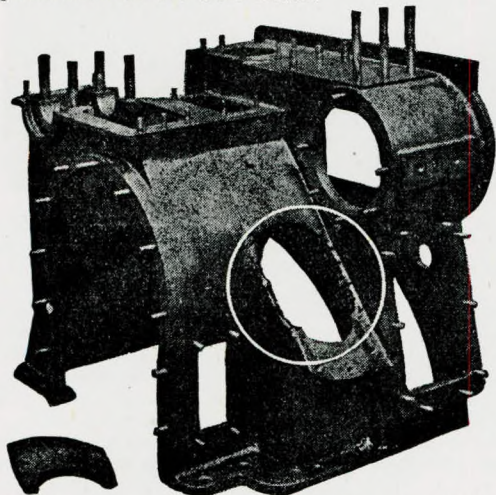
The rear-end top casing of a high-speed marine engine from which an air pump seating was broken away.
